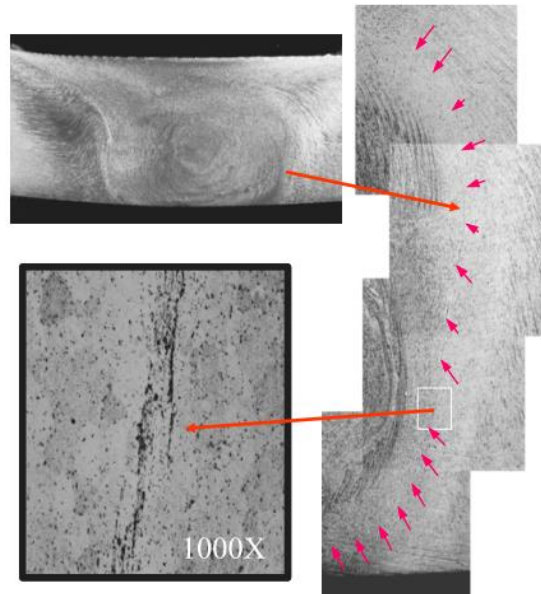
Example of Surface Faying in Friction Stir Welded Joints
